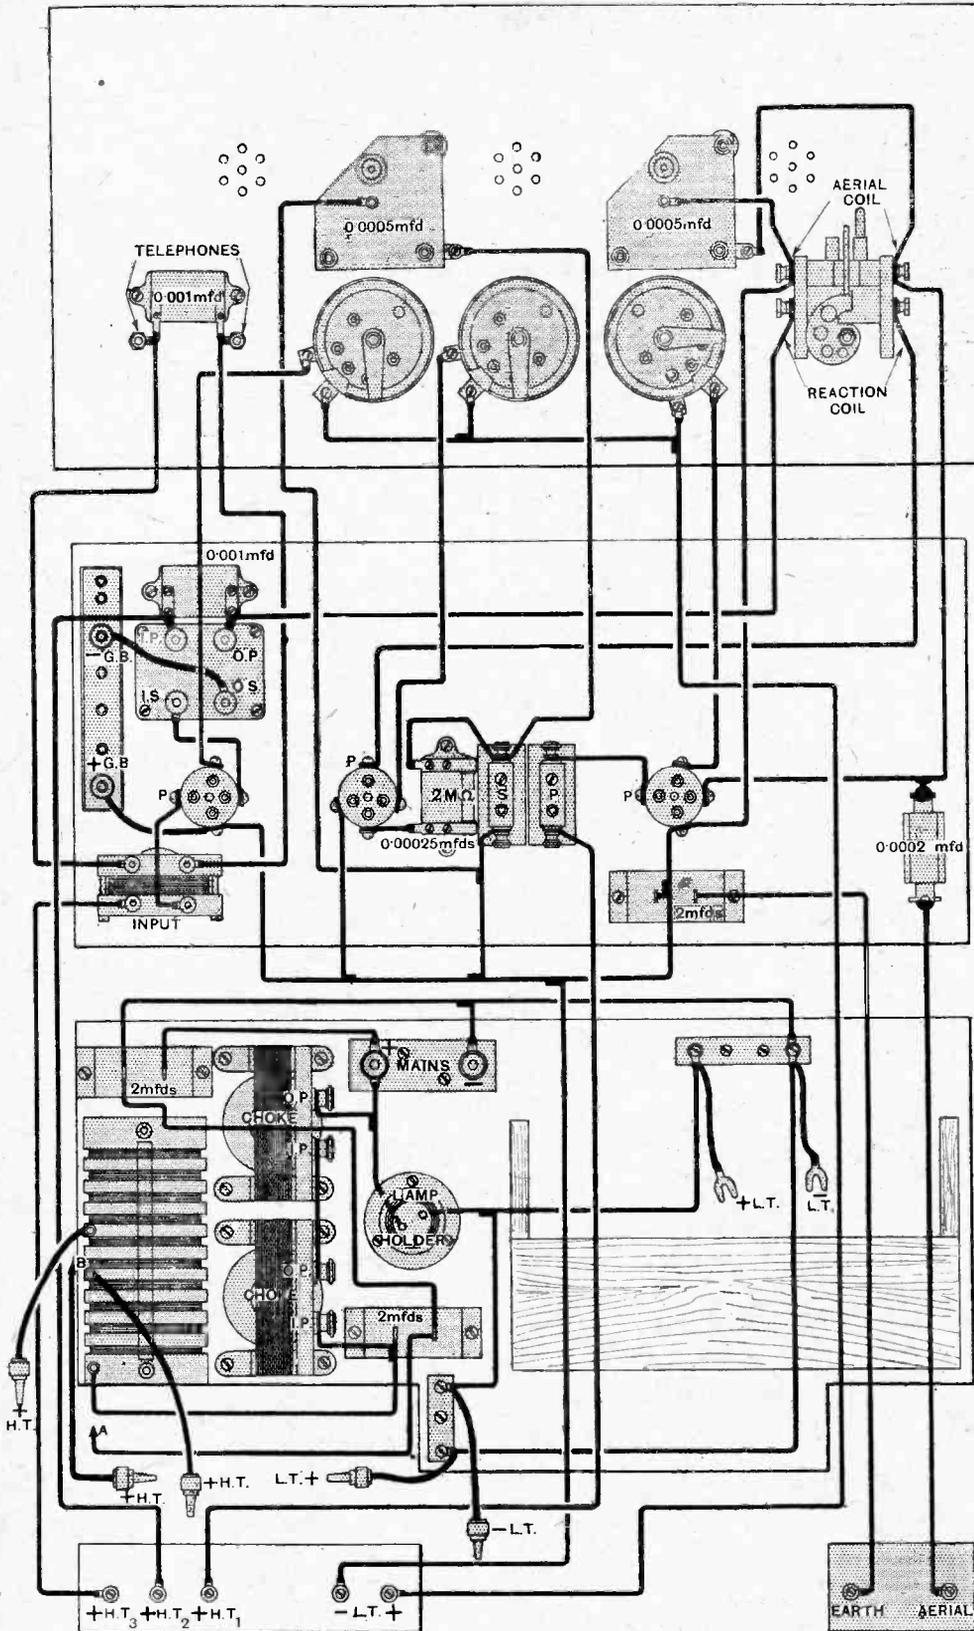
Complete details for wiring both the receiver and the mains unit.
